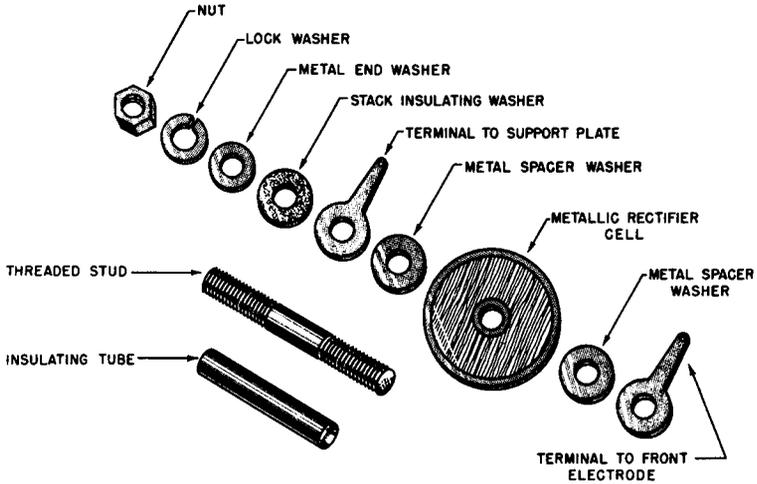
Elements of a Selenium Rectifier Stack Assembly.
